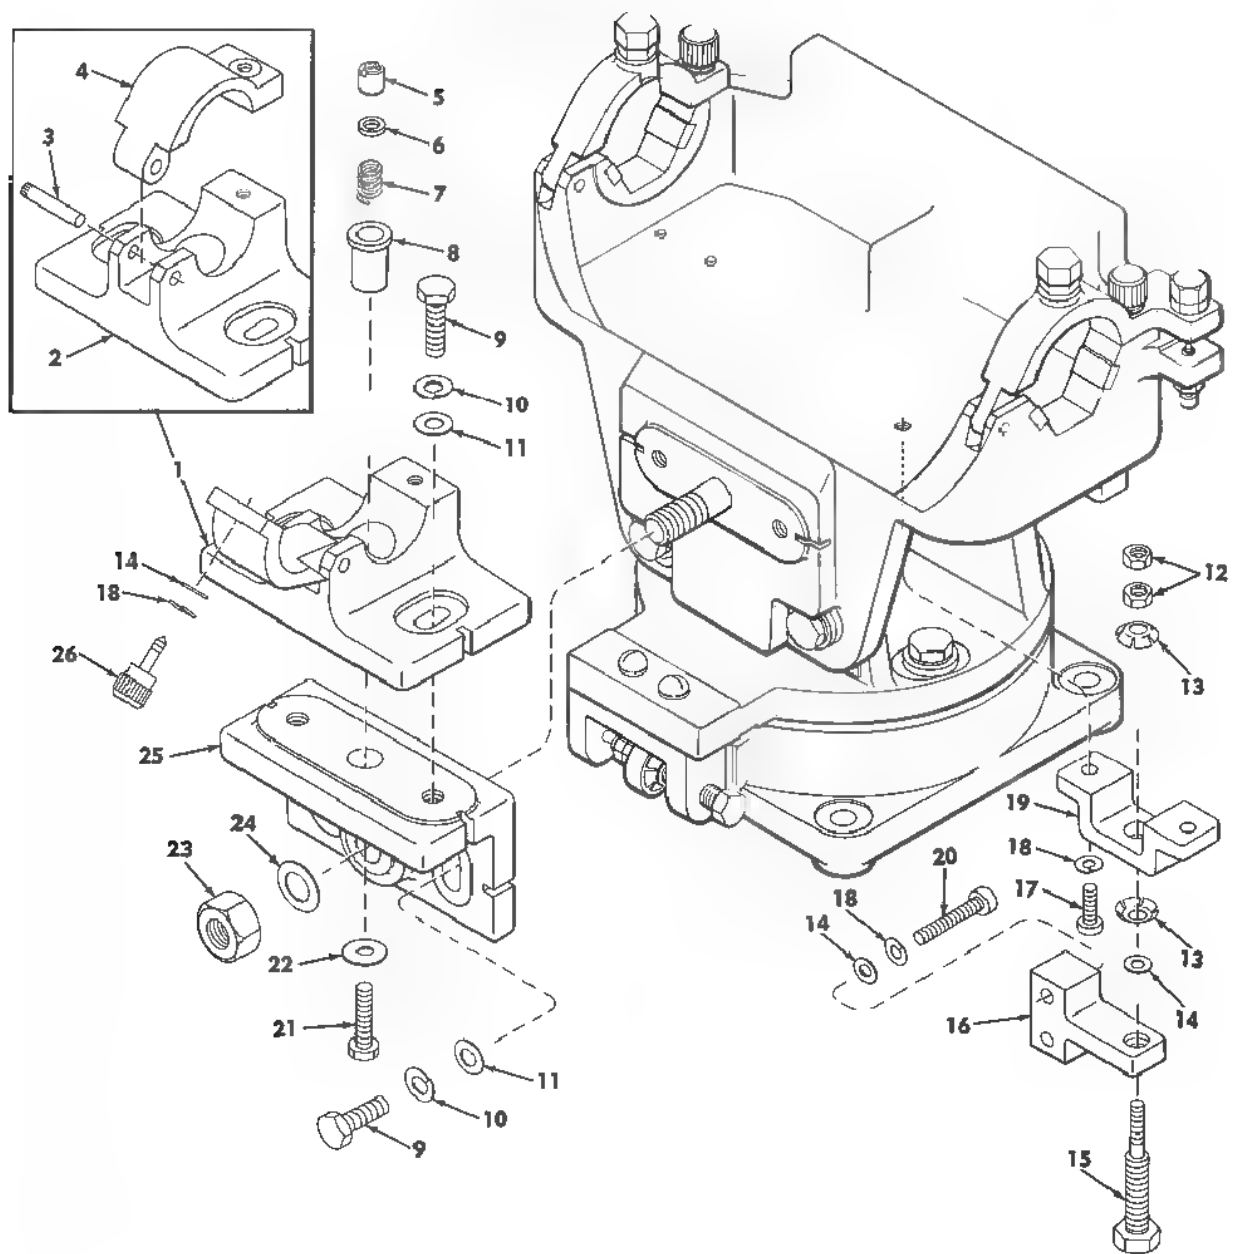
CLUTCH ASSEMBLY /10185498/-EXPLODED VIEW
